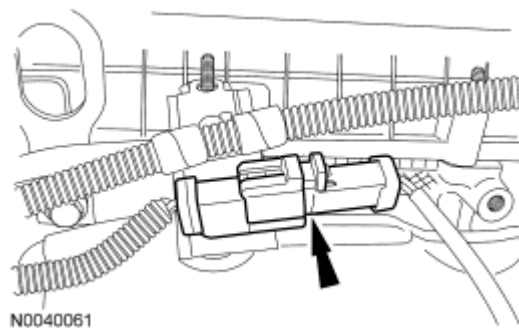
Locating Heated Oxygen Sensor (HO2S) Electrical Connector
